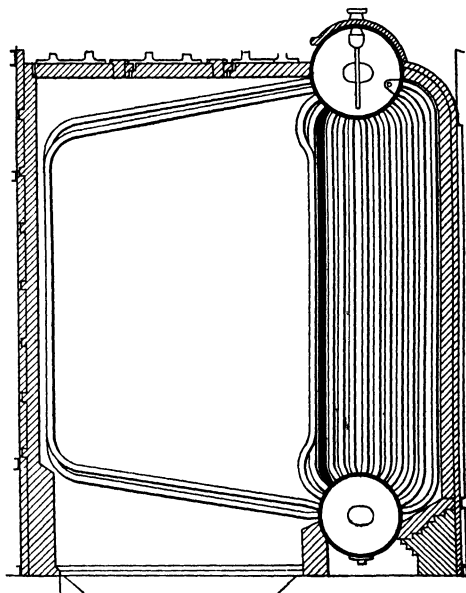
Two-drum vertical-bent-tube boiler. Gas flows in a horizontal plane toward the back of the boiler and then forward through the tube bank. (*Steam Generator Company.*)
